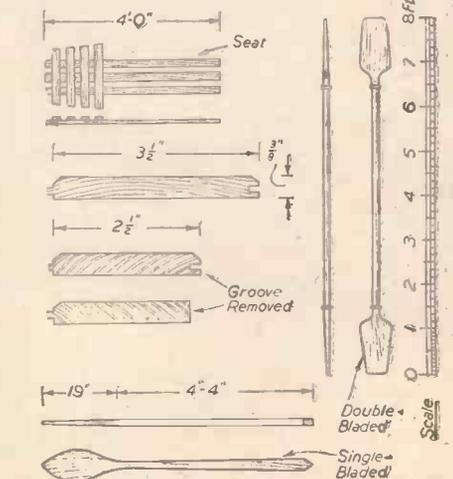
Details of seat, paddles and sections of tongued-and-grooved sheeting material used in making the hull.
